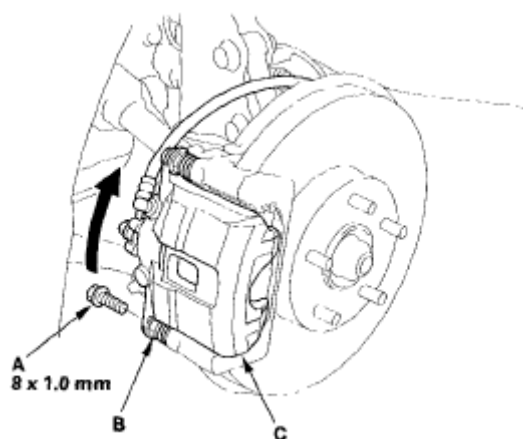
Removing Flange Bolt Holding Caliper Pin With Wrench
